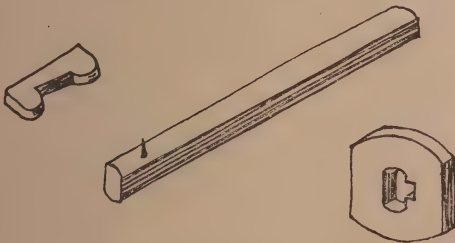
Home-made Marking Gauge with Wedge Fastening
